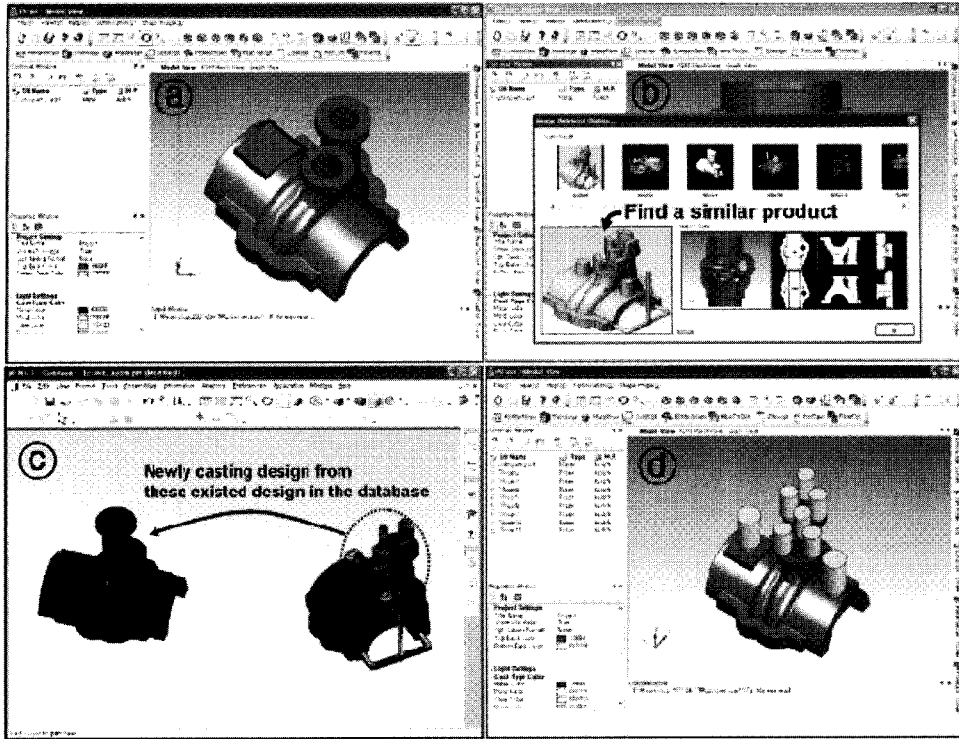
Flow chart of optimum casting product design for sand/mould and die-casting casting process among case-based modules
